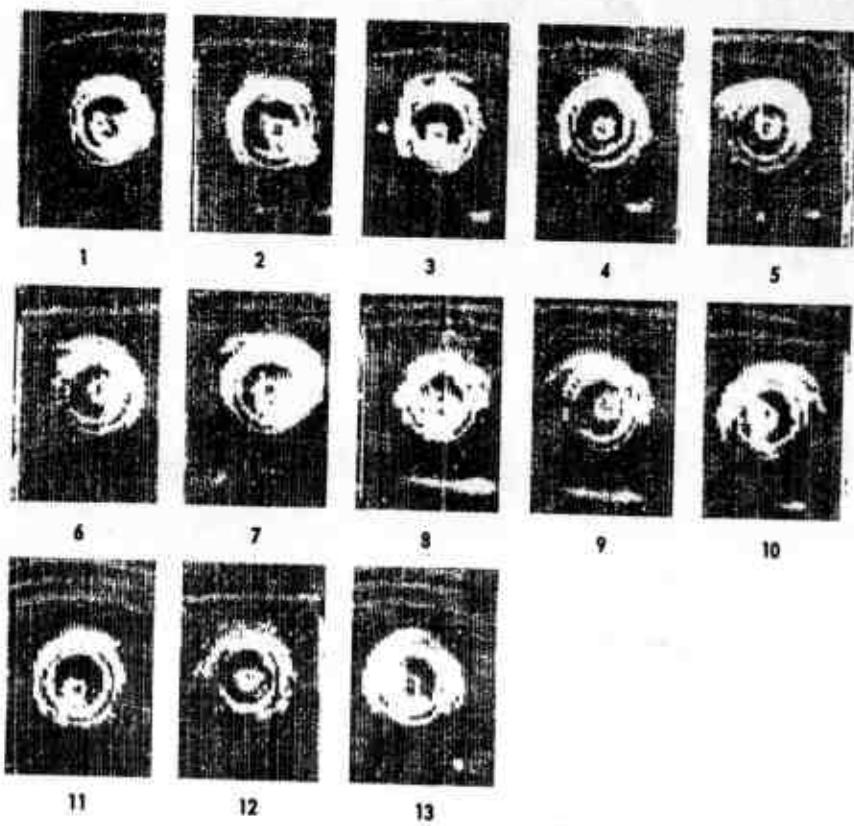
C-Scan Record of Series 8 Welds.
